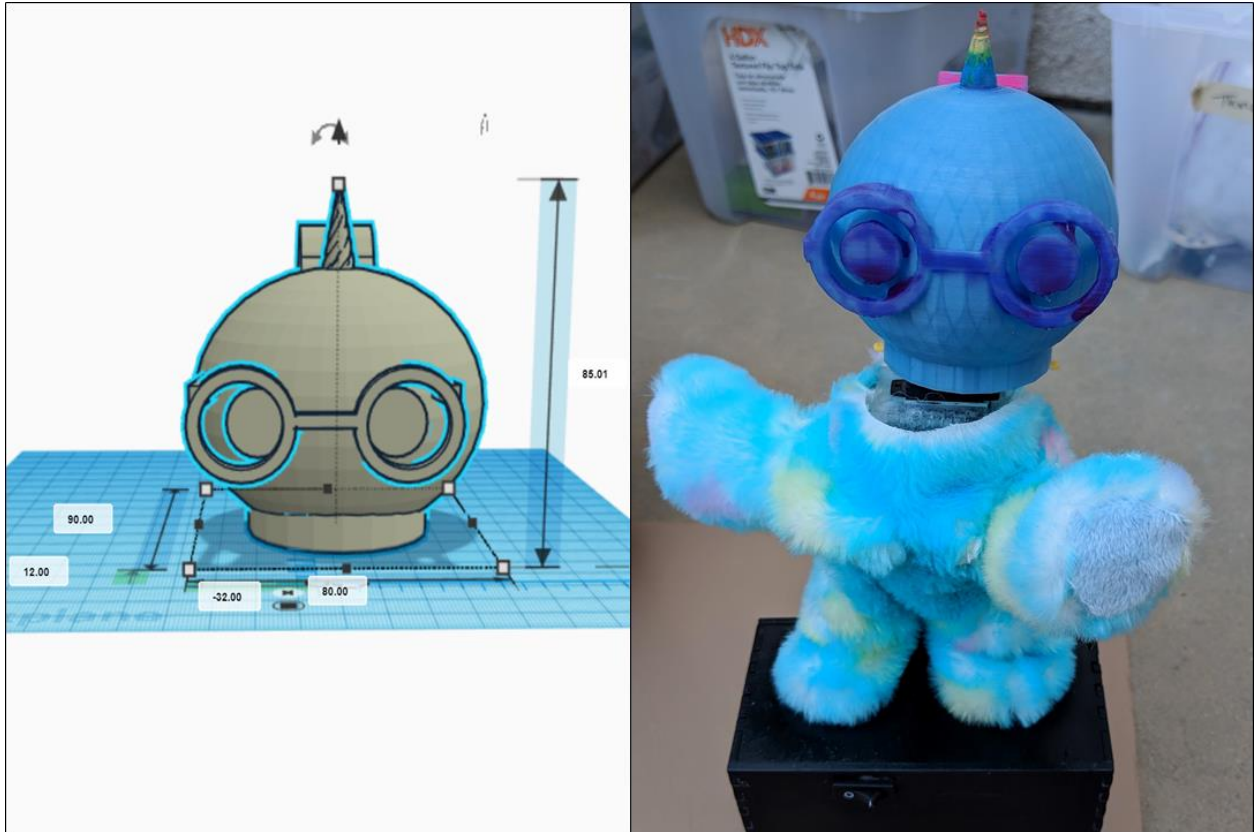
The 3D design for Sadie’s robot head in TinkerCAD (left) and the completed robot (right).
